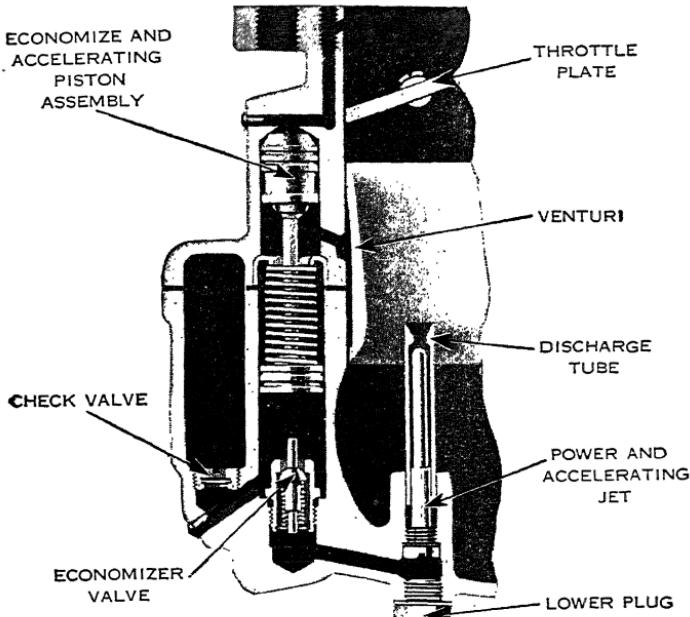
Sectioned View of Zenith 150 Carburetor showing Accelerating Pump
